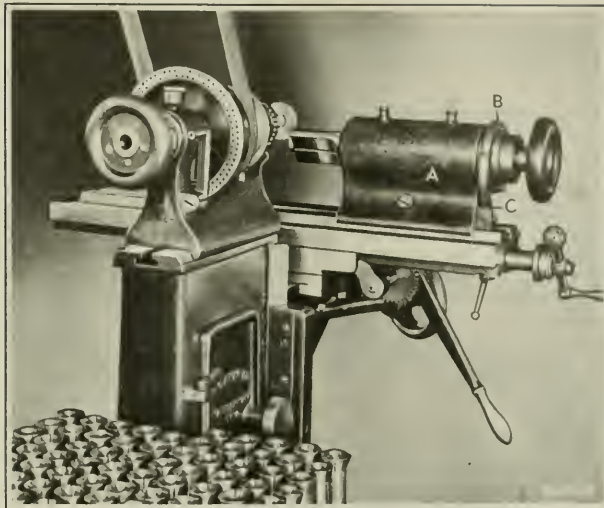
Bench Milling Machine, and the Set-up used in slotting Spring Collets
